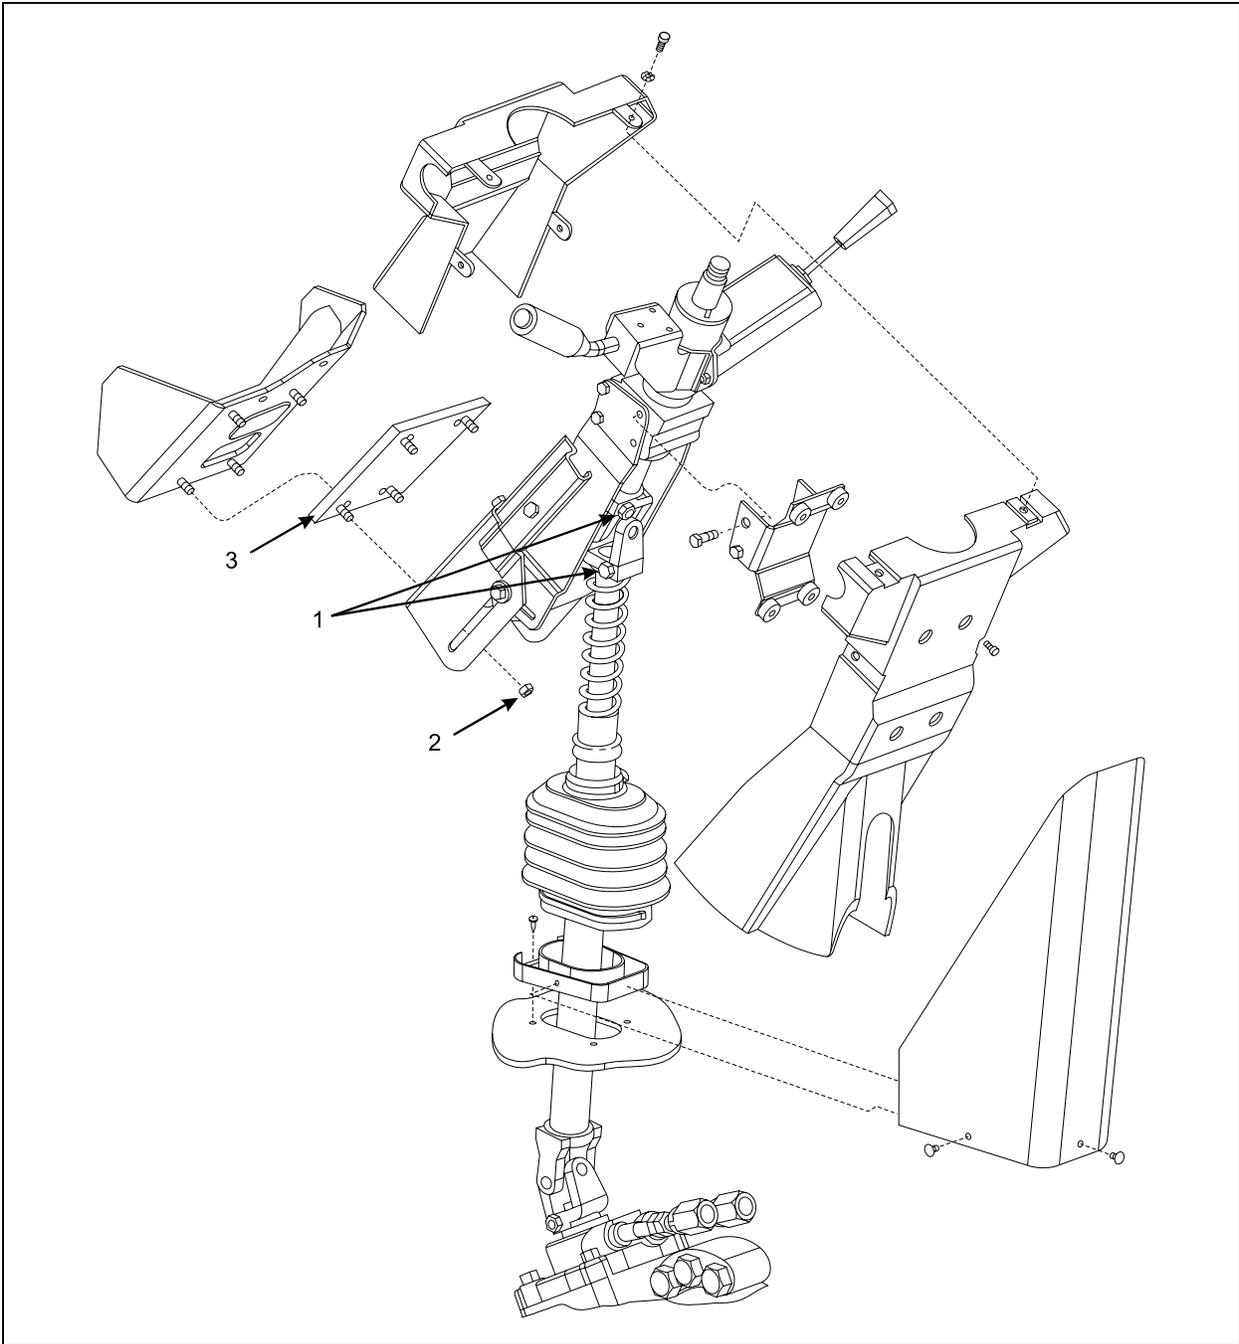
EXPLODED VIEW OF THE STEERING COLUMN AND RELATED COMPONENTS
